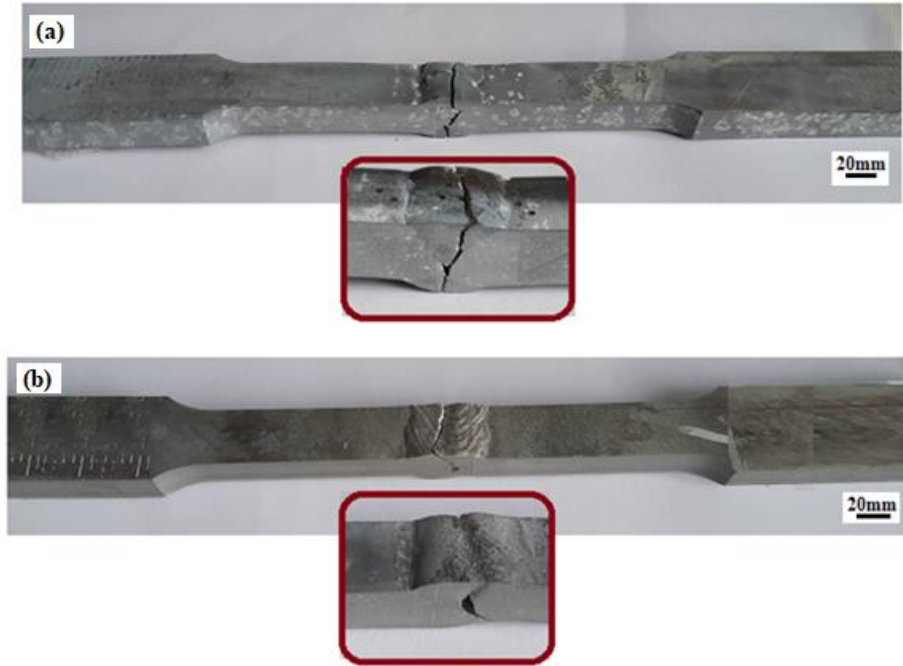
Macro images of welded samples (a) TIG welding (b) MIG welding
